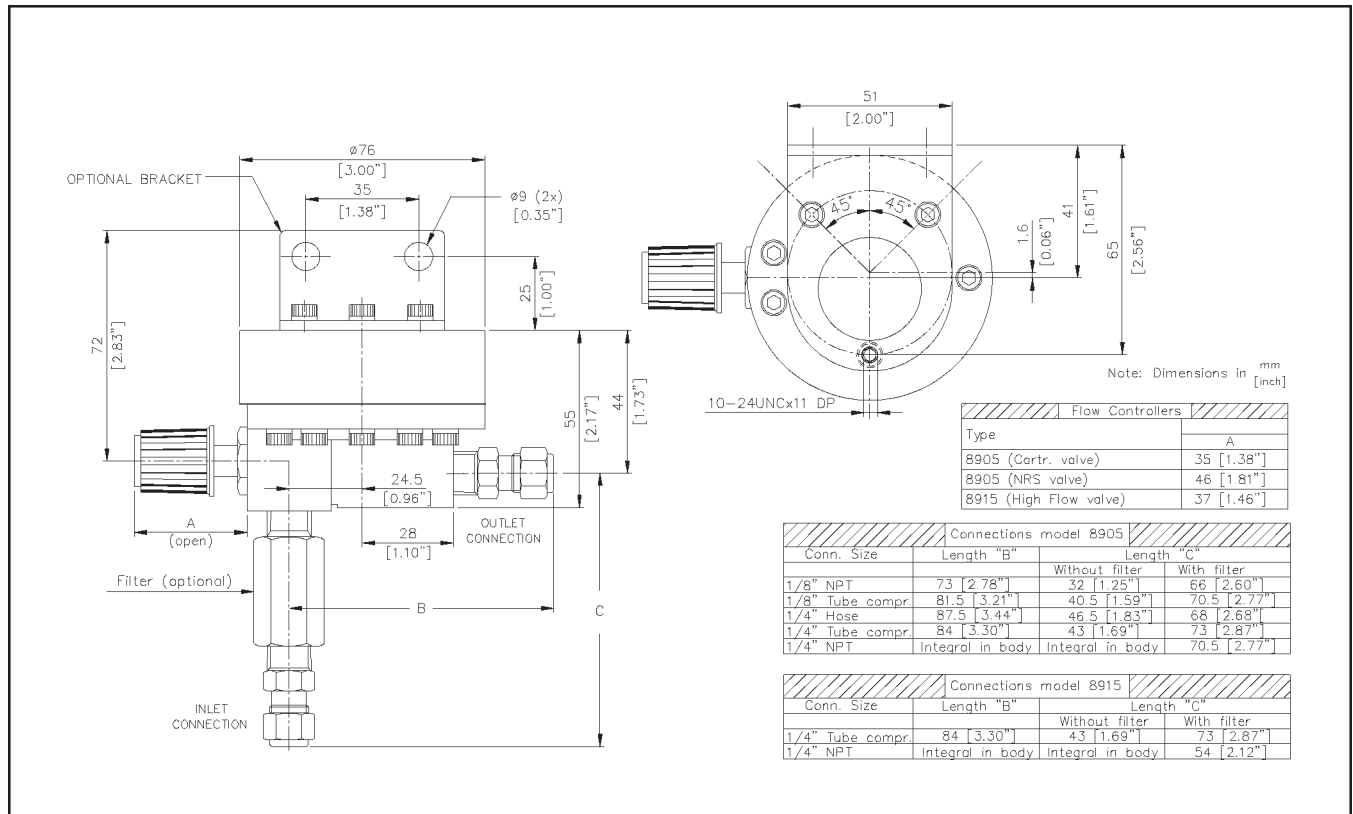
Dimensional Drawing Models FC 8905 and 8915
